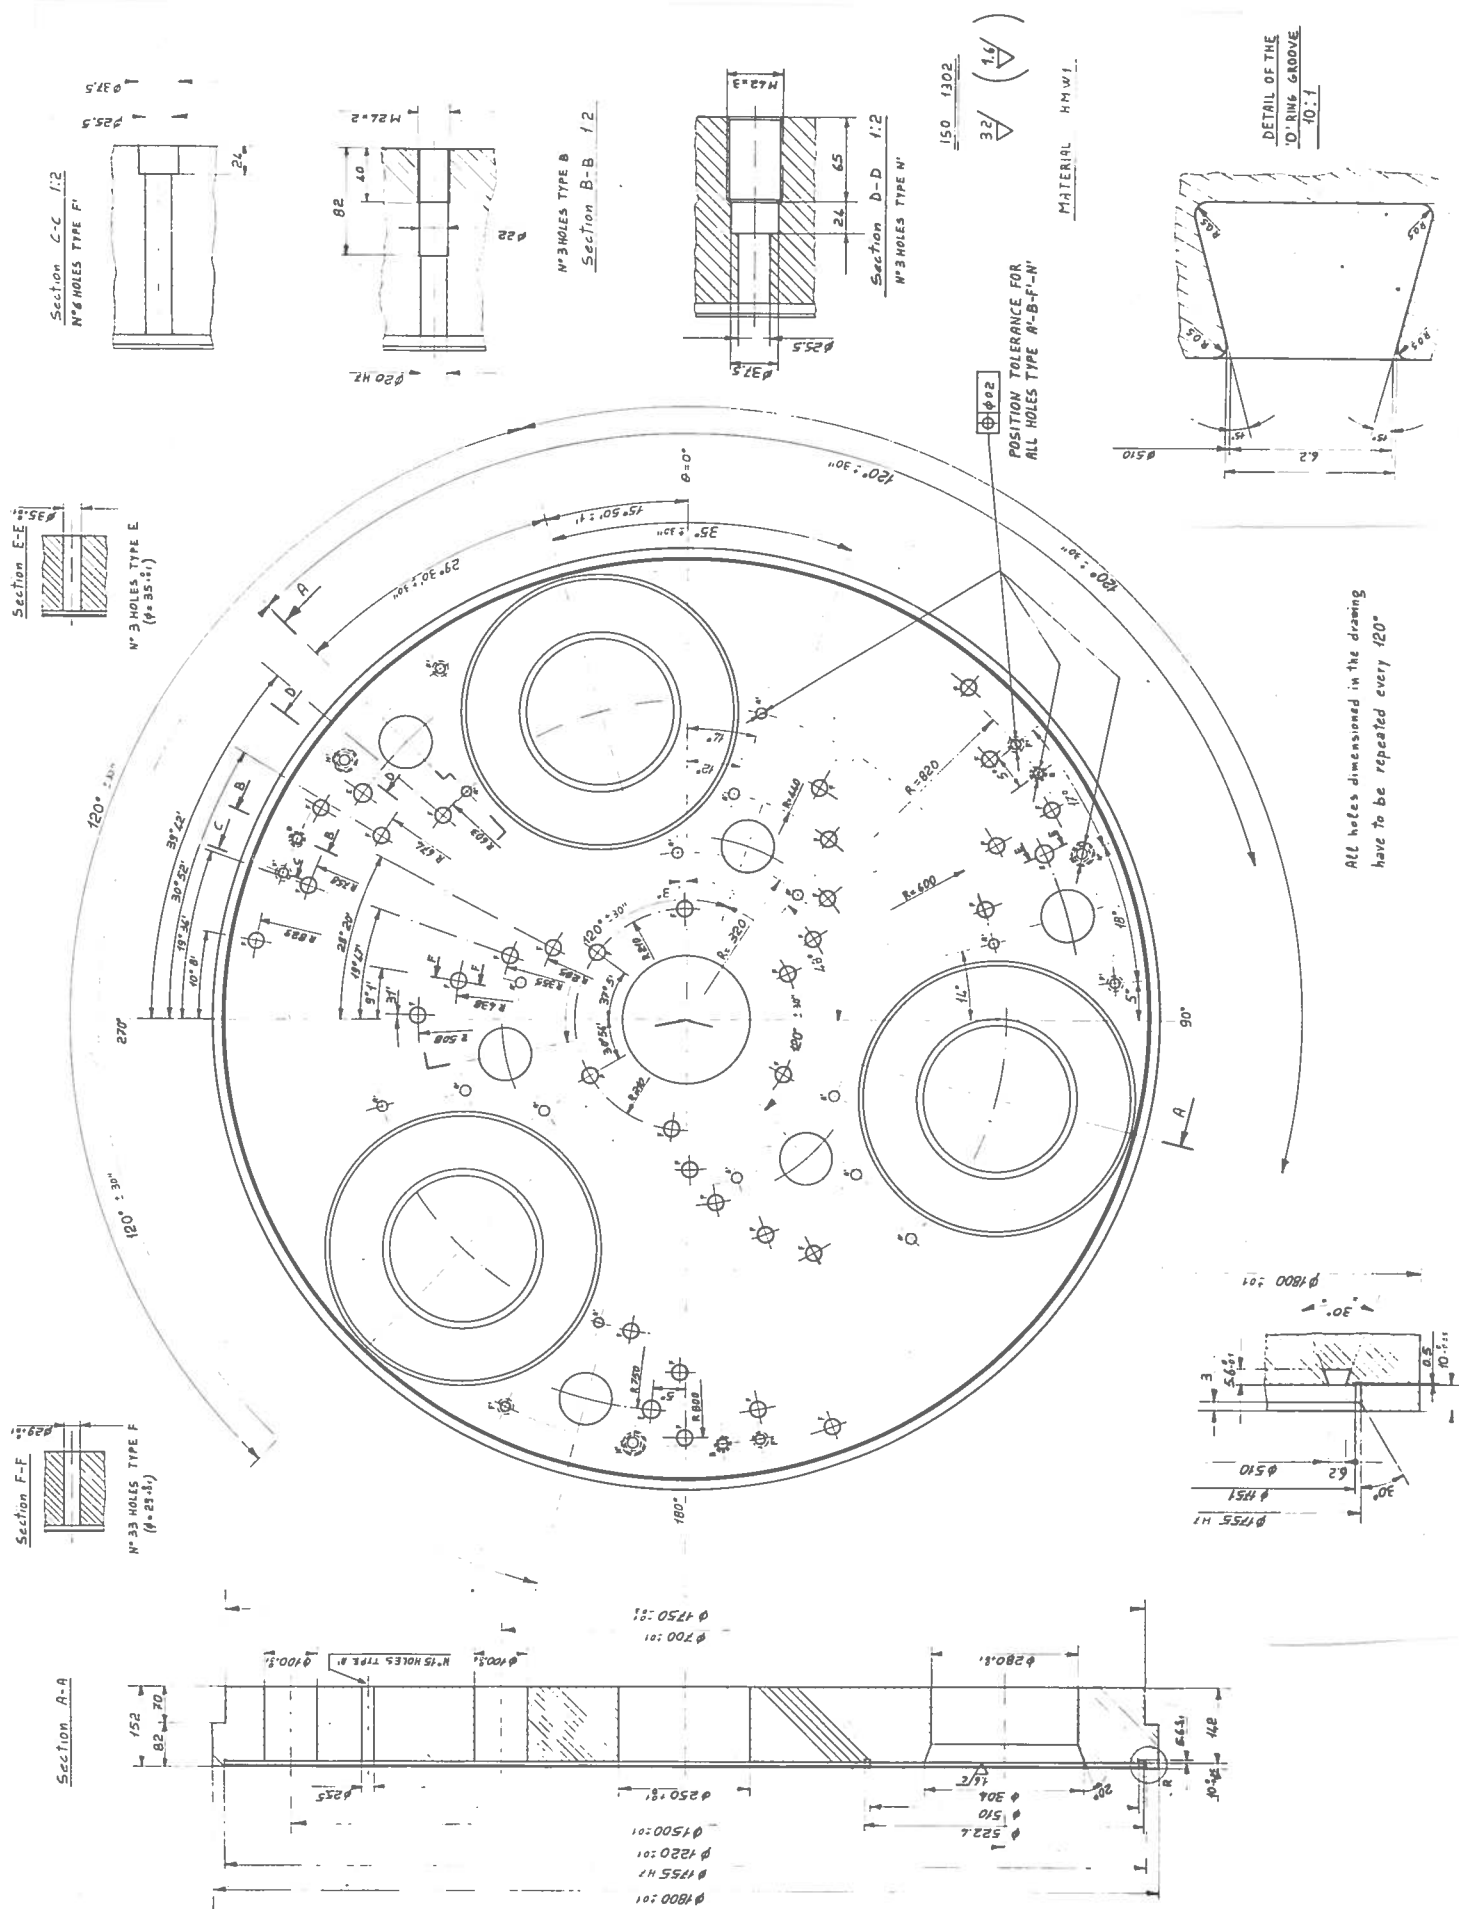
Cross section and plane view of the upper plate of the magnet yoke.
